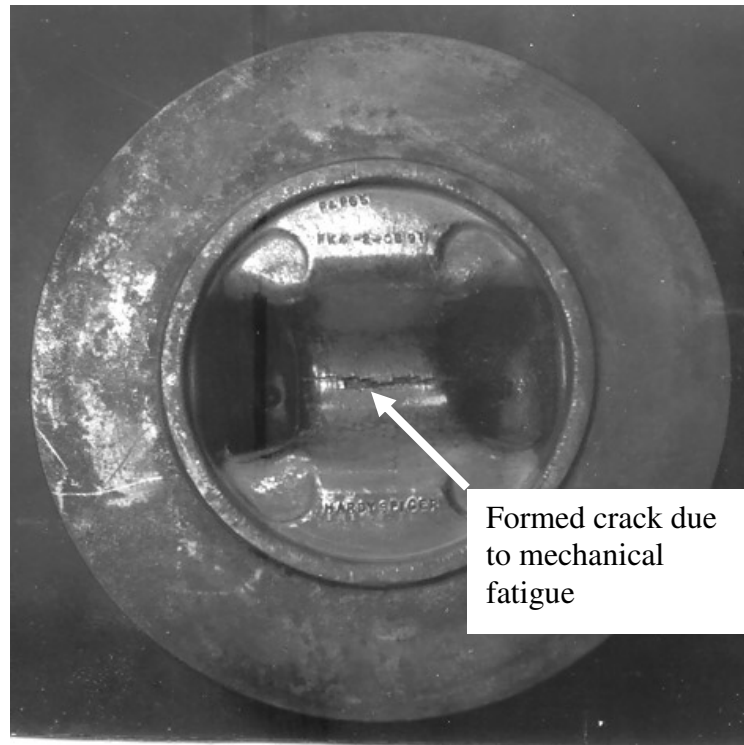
The observation of the mechanical fatigue crack on a forging die (Thomas, 1970).
